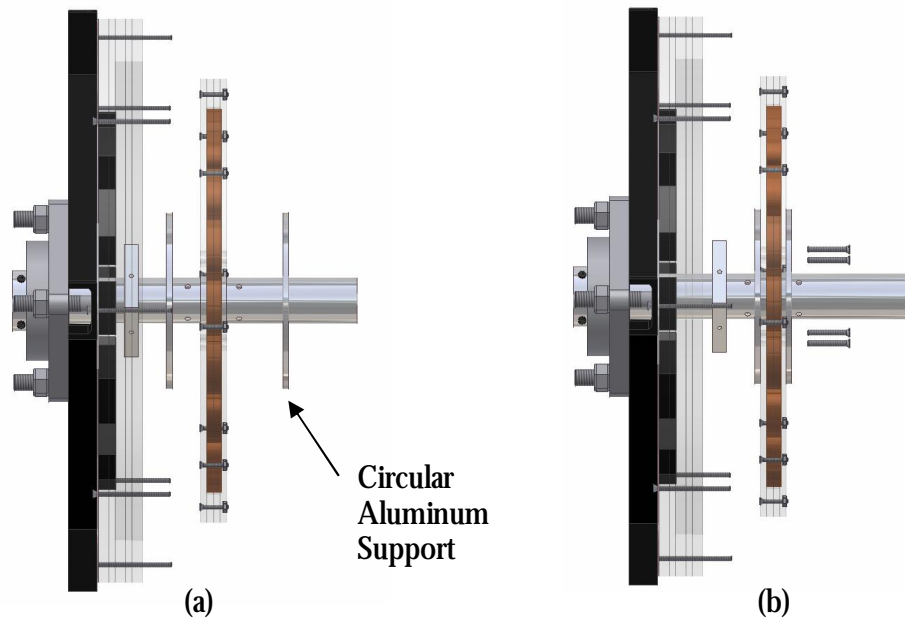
Assembled the Circular Stator Supports. Using No. 12-24 screws, the circular aluminum supports should be fastened to the acrylic stator.
